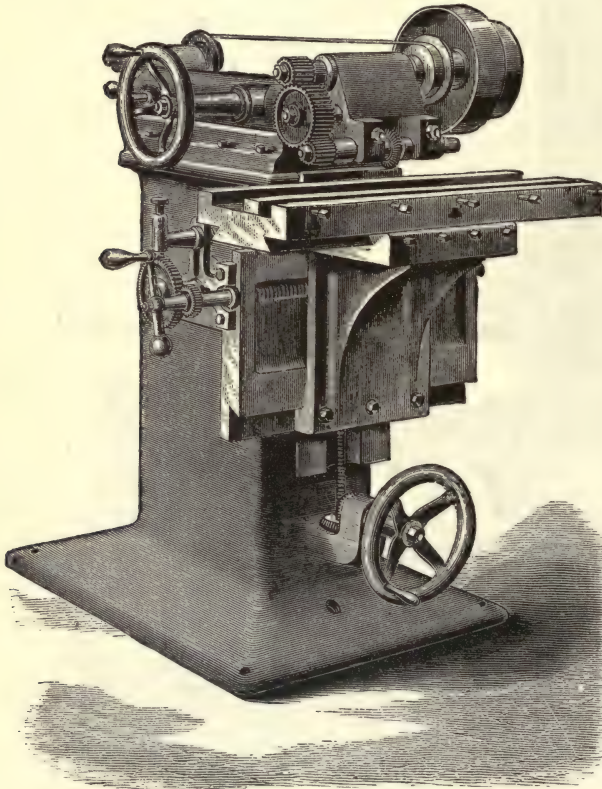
The Pratt & Whitney rack-cutting machine.
